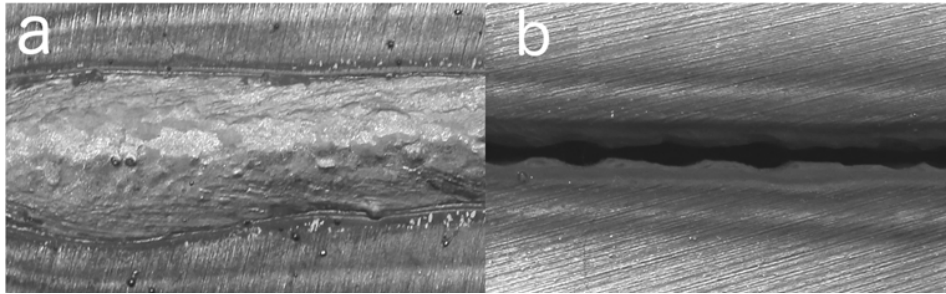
(a) Abrasive water cut joint Wb3 welded with 14 kW laser power, 0.5 m/min travel speed, 5 m/min wire feed, zero gap assembly, (b) Laser cut joint La, welded with the same parameters but resulted in drop through.
